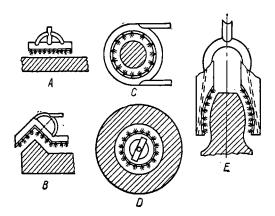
Configuration of hardening inductors: a - flat rectilinear configuration; b - angle configuration; c-annular configuration for surface hardening of cylinder-shaped parts; d-annular configuration for hardening of internal surfaces; e - modular configuration
